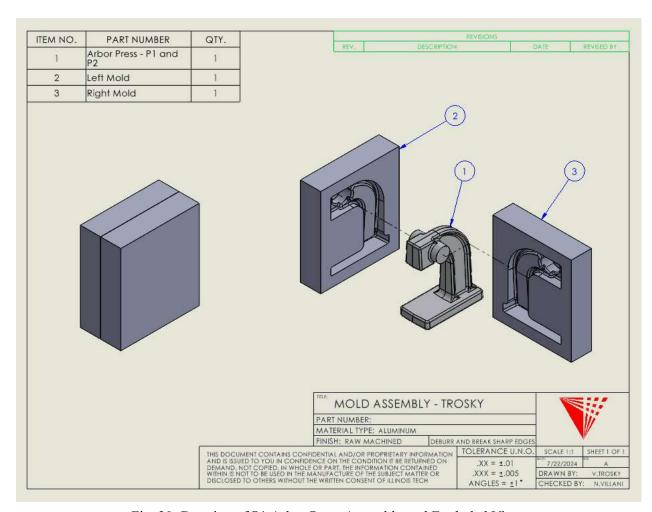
Drawing of P1 Arbor Press Assembly and Exploded View
